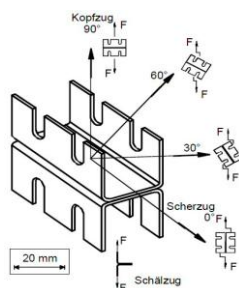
KS-II test specimen used for characterising weld spots.
